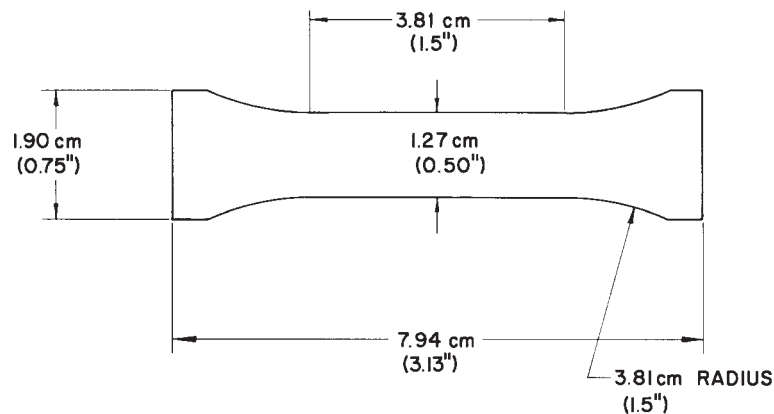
Compression Test Specimen for Materials Less than 3.2 mm Thick
